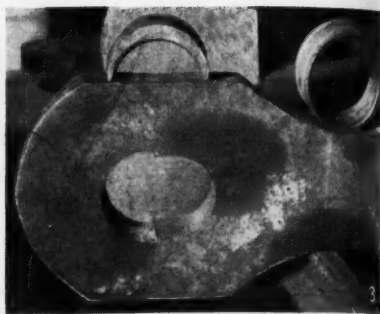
By using a hardened steel insert in the coupling hole in the drawbar, wear is reduced and time is saved on repairs.
